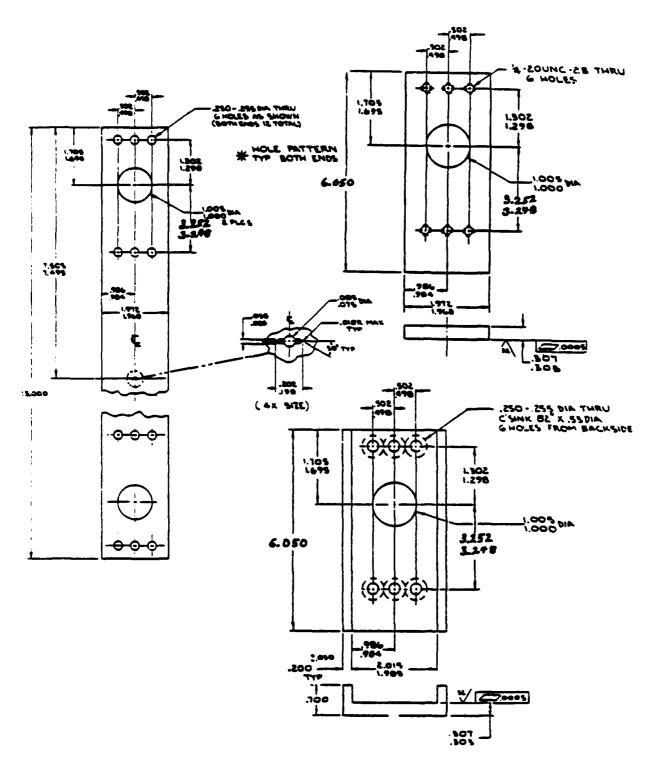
Drawings Showing the Dimensions of the Preliminary Specimen Subjected to Modal Analysis
